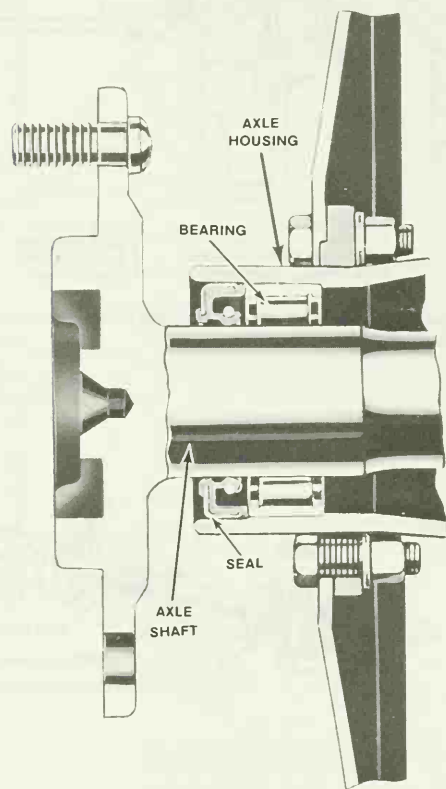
The wheel end of the axle is supported in a bearing that fits between the shaft and the housing. (Chevrolet Motor Division of General Motors Corporation)
